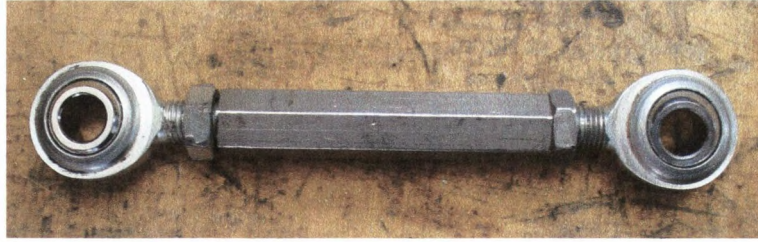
Adjustable hexagonal rod with rod ends used to tension the chain.
